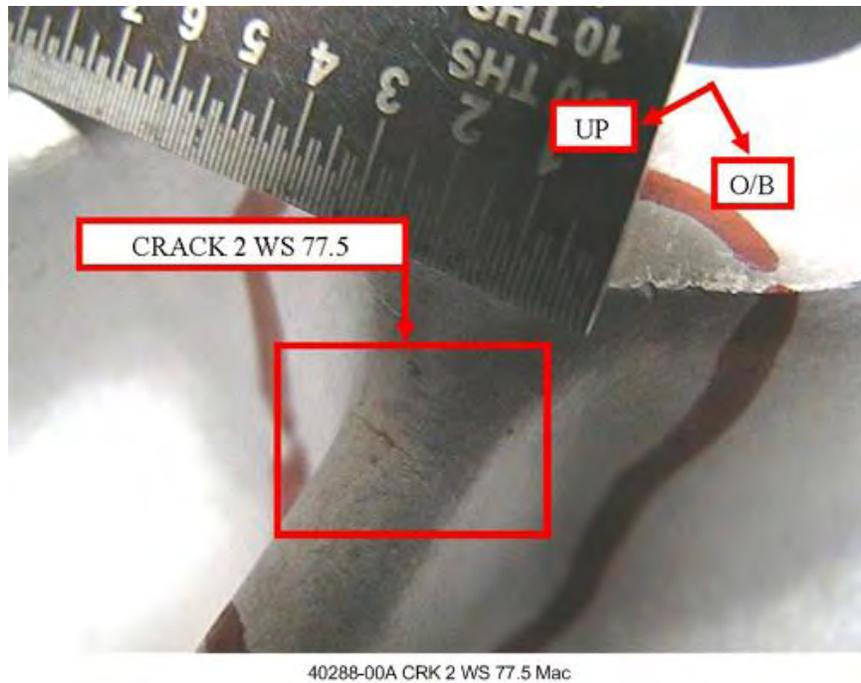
Macroscopic View of Crack 2 on the Right Wing Trunnion Landing Gear Aft WS 77.5
